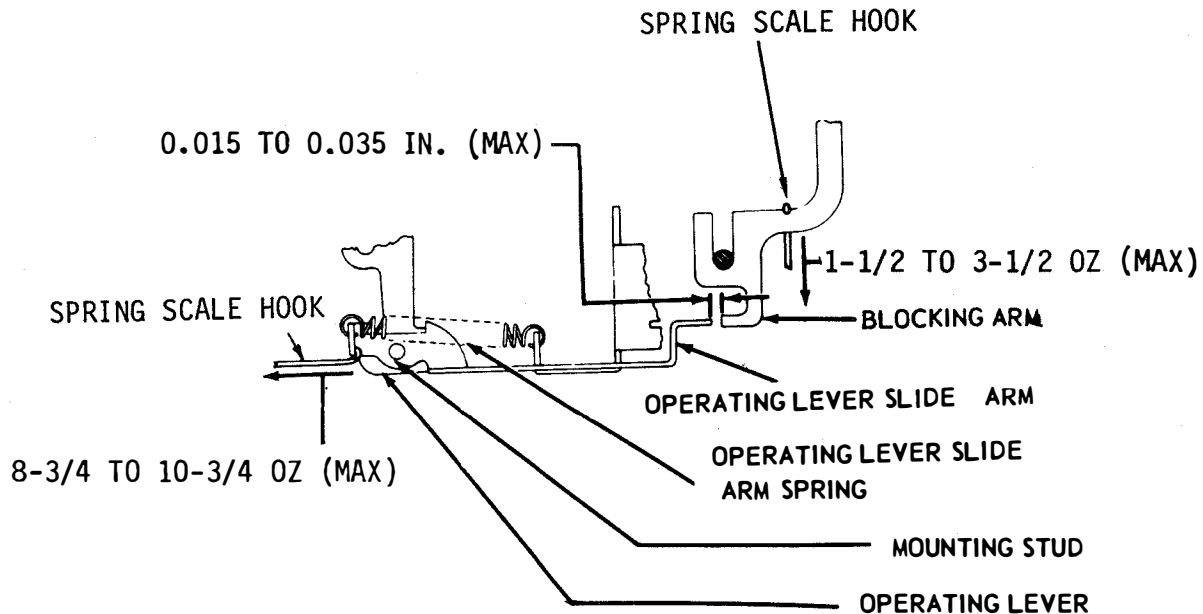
Operating Lever Slide Arm, Operating Lever Extension Link Spring, and Tabulator Shaft Spring (Torsion), Left Side View
